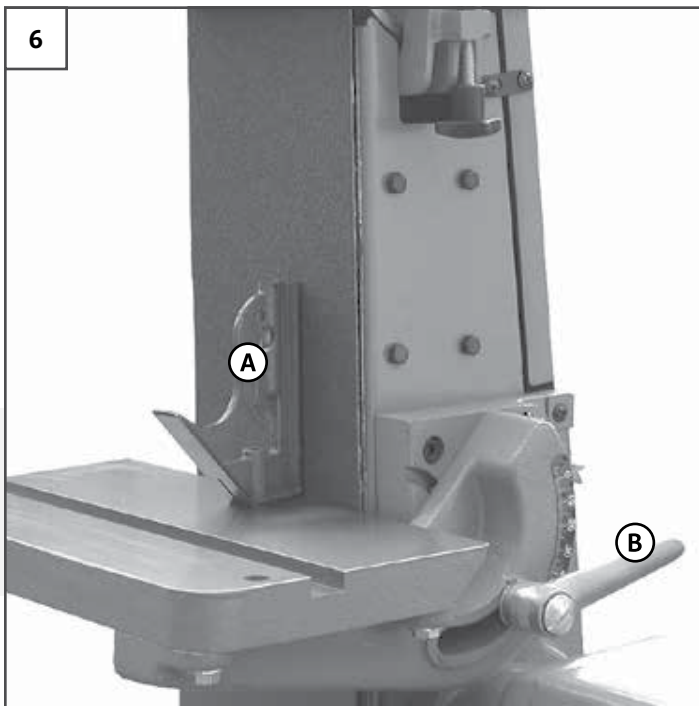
ADJUSTING BELT TABLE BEVEL STOPS
